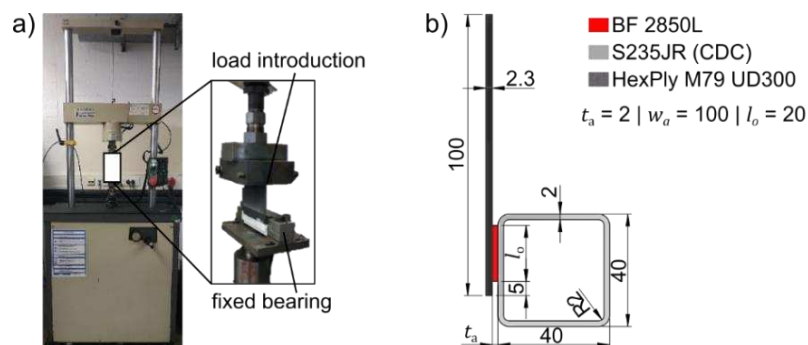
Sub component tests, a) servo-hydraulic testing machine with specimen, b) geometry of LWF Profile Sheet Specimen
